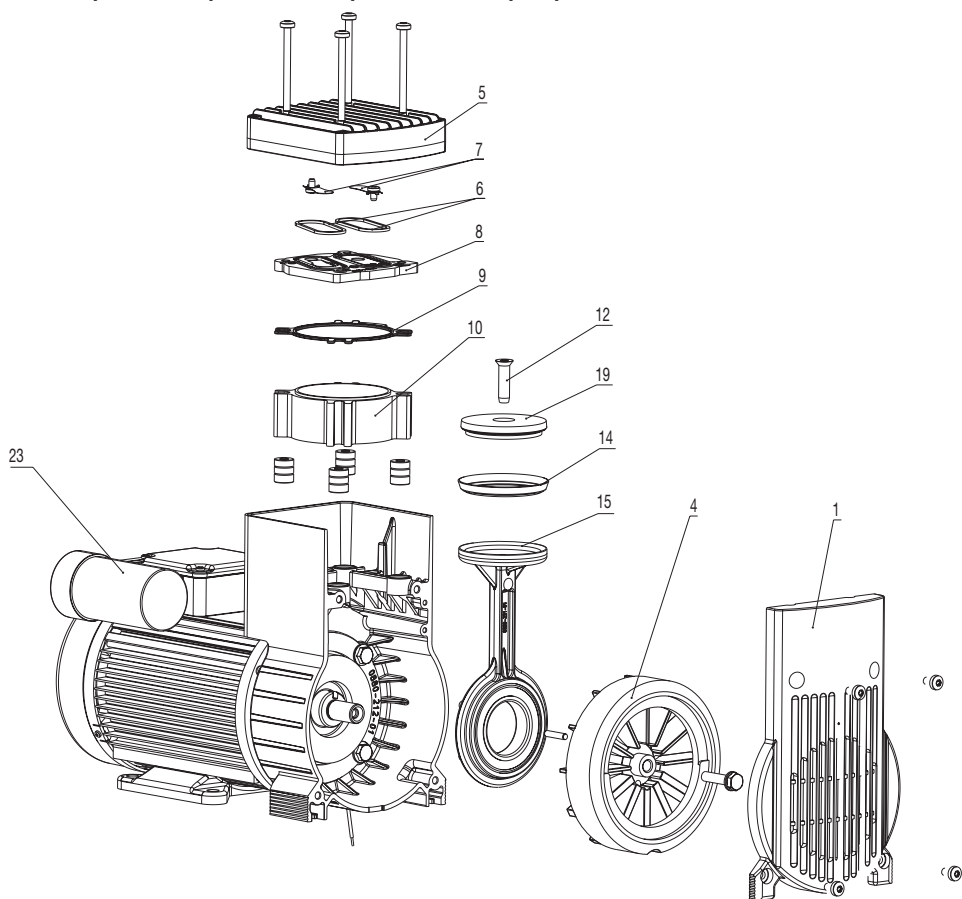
Oil-free piston compressors and piston vacuum pumps KK70 with item numbers for spare parts
